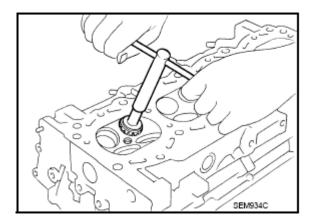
Finishing Valve Seat Using Valve Seat Cutter Courtesy of NISSAN NORTH AMERICA, INC.
